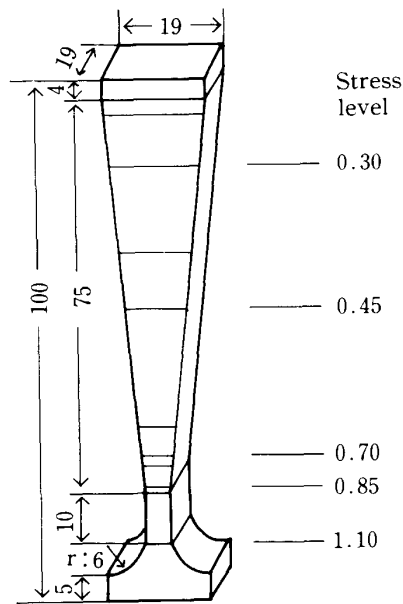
Shape and dimensions of compression test specimen (Dimension in mm)
